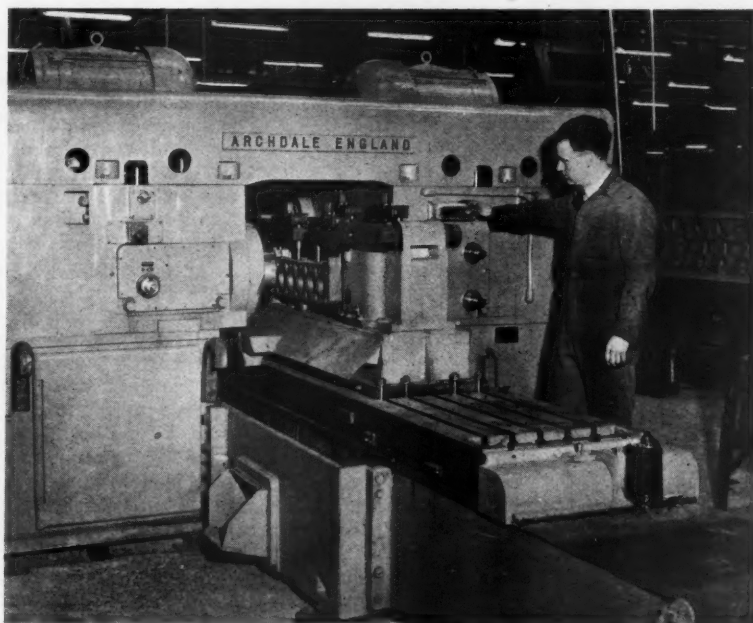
Rough and finish milling the sump joint face and rough and semi-finish milling the cylinder head joint face on a special Archdale duplex milling machine.
